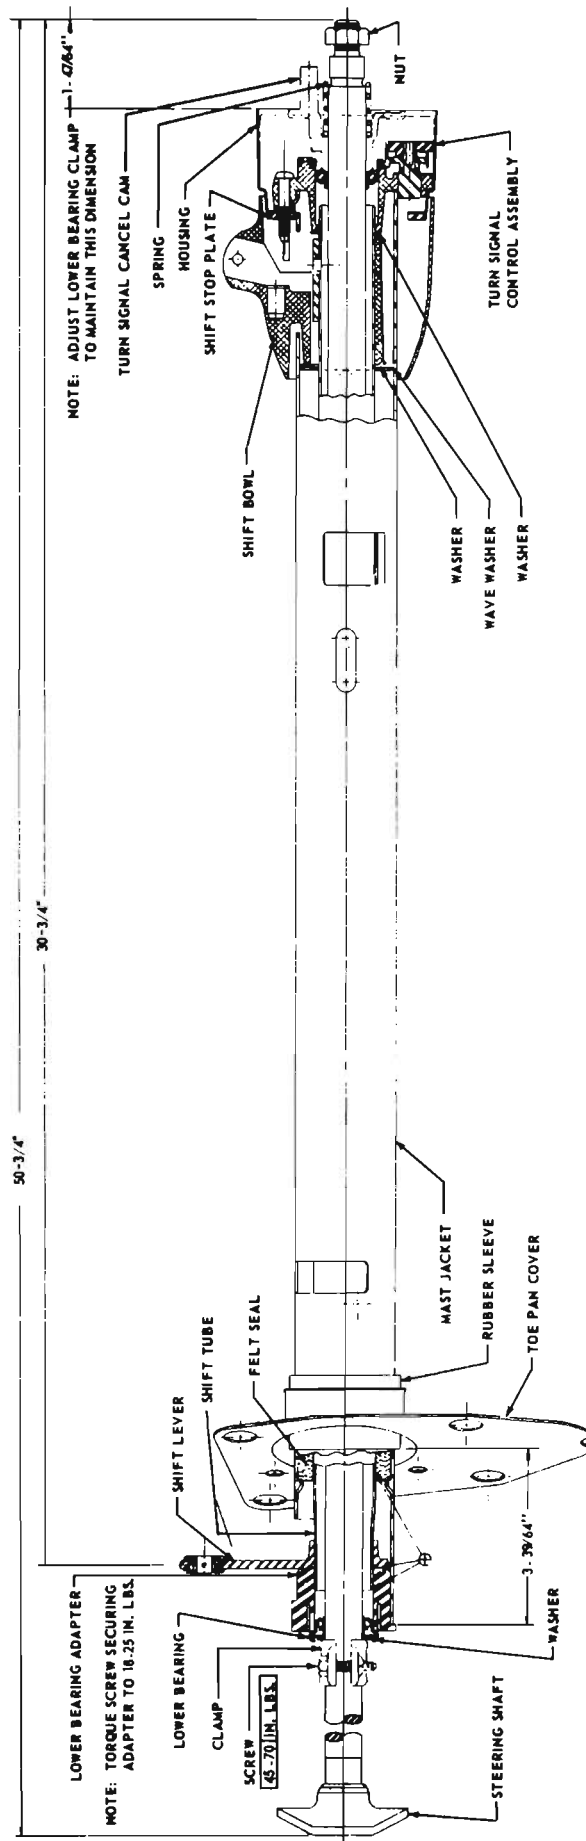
Mast Jacket and Transmission Control Shaft Assembly - Automatic Transmission
